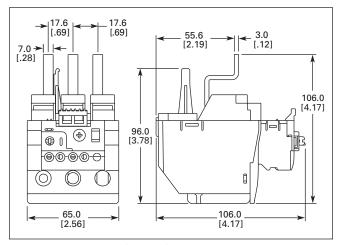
65 mm C396 (15 – 75A) Direct Connect to XT Frame D Contactor — Approximate Dimensions in mm [in]
